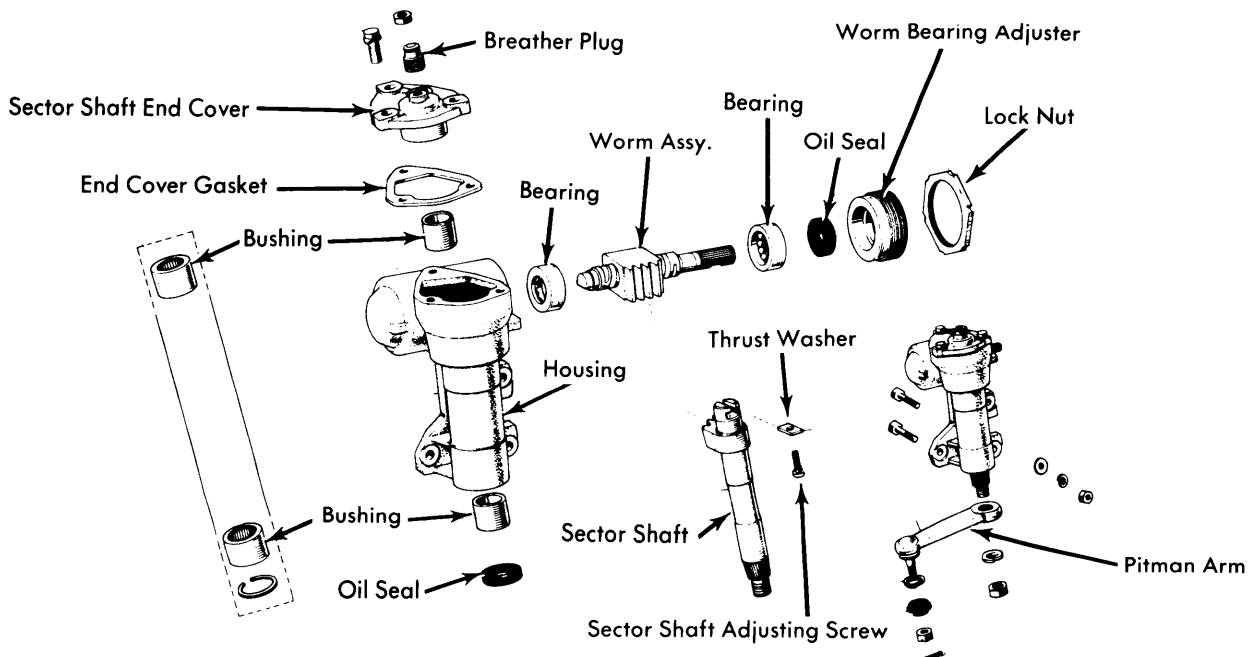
Exploded View of Corolla Steering Gear Assembly
